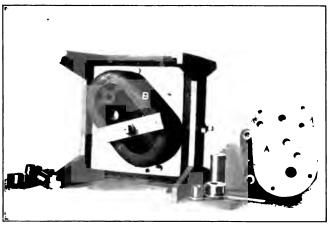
Rear View of Drill Jig shown in Fig. 75, with Cover to be Drilled in Place
